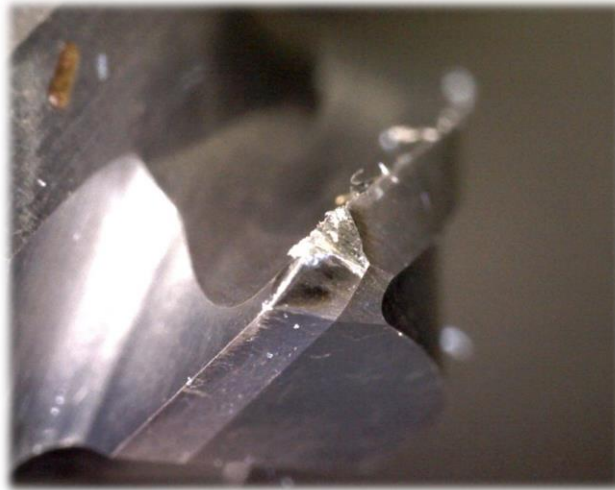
The cutting edge of a Z-Carb tool after it has been used to cut Ti-64 with steel settings
